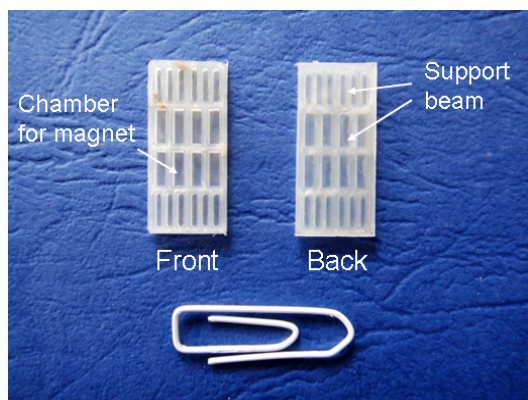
PVDF magnet holders fabricated with the tool on the right in Fig. 6.10.
